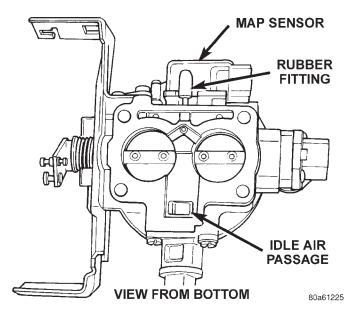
MAP Sensor L-Shaped Rubber Fitting—5.2L/ 5.9L Engines
